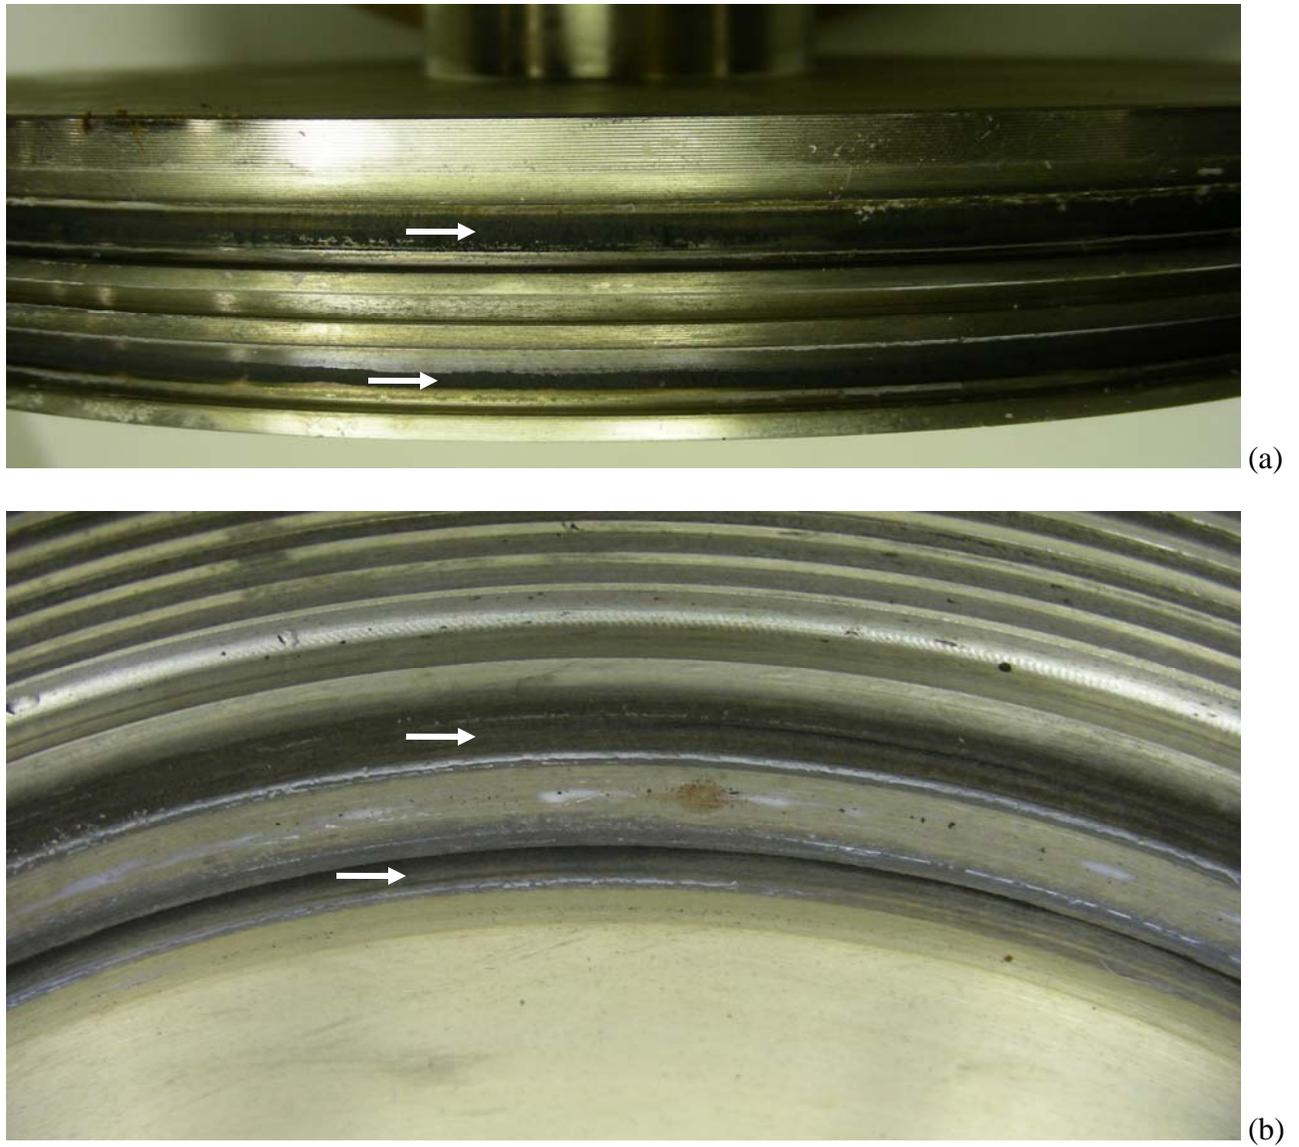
Black stain on fixture 8 plug (a) and body (b) following disassembly.
